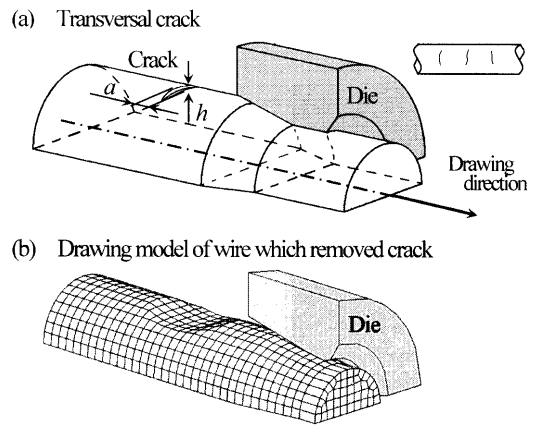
Drawing model of a wire containing a transversal crack and peeling part.
